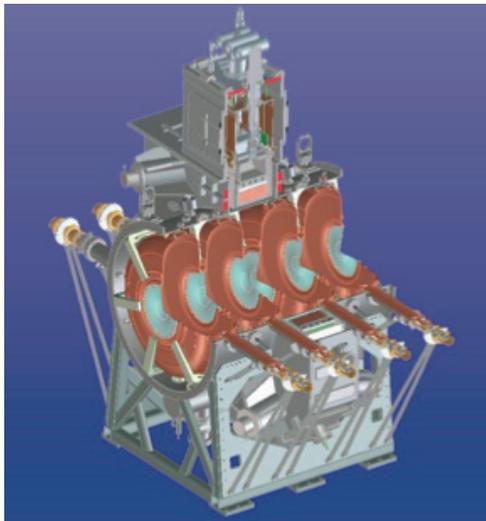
Cutaway of a CAD drawing of an RFCC module. There will be two such modules in Step VI.
